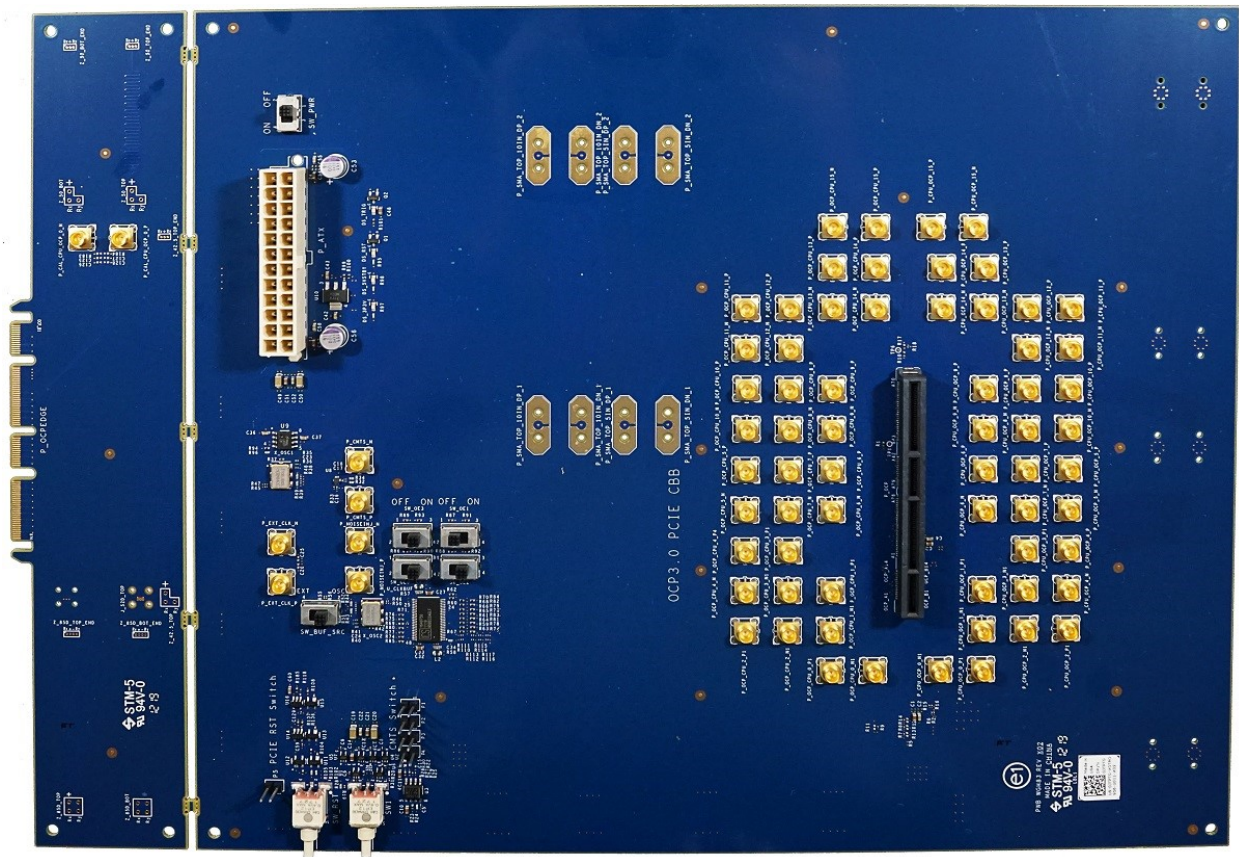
PCIe Load Board Test Fixture for OCP NIC 3.0 SFF
